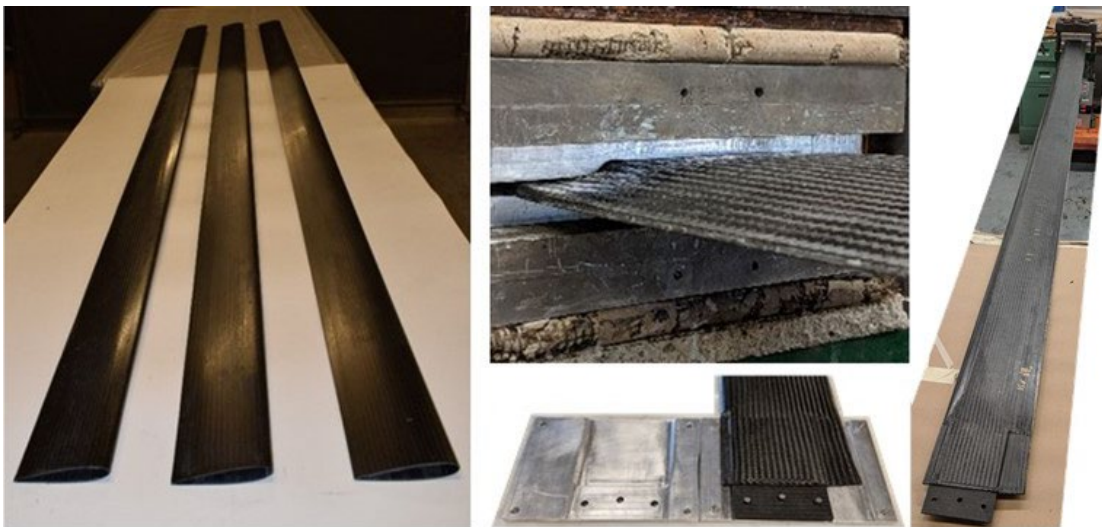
Trimmed 129" blades (left), Thermoforming of the mounting tab (middle), straight blades with integrated mounting tabs (right)
